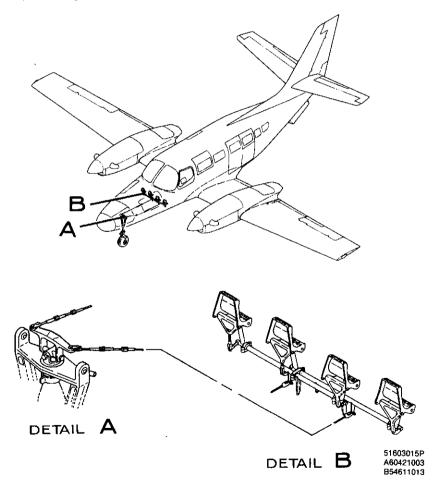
NOSEWHEEL STEERING SYSTEM
